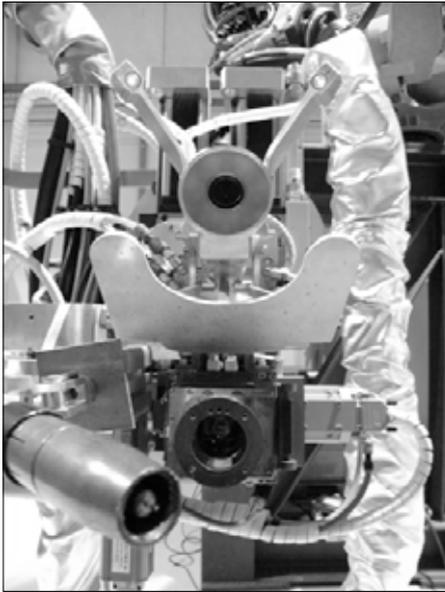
Front view of process head with industrial vision system in position. The setup of the mechanical stops on the pneumatic slides is such that the axis of the CCD camera aligns with the robot wrist axis (axis 6).
